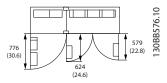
Space in front of IP21/IP54 enclosure type, frame size F12
